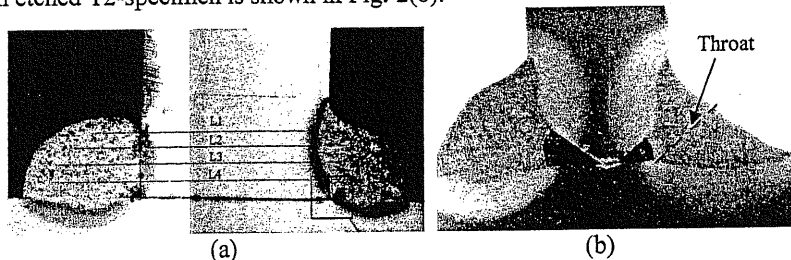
Typical etched specimens (a) T1-weldment, (b) T2-weldment
